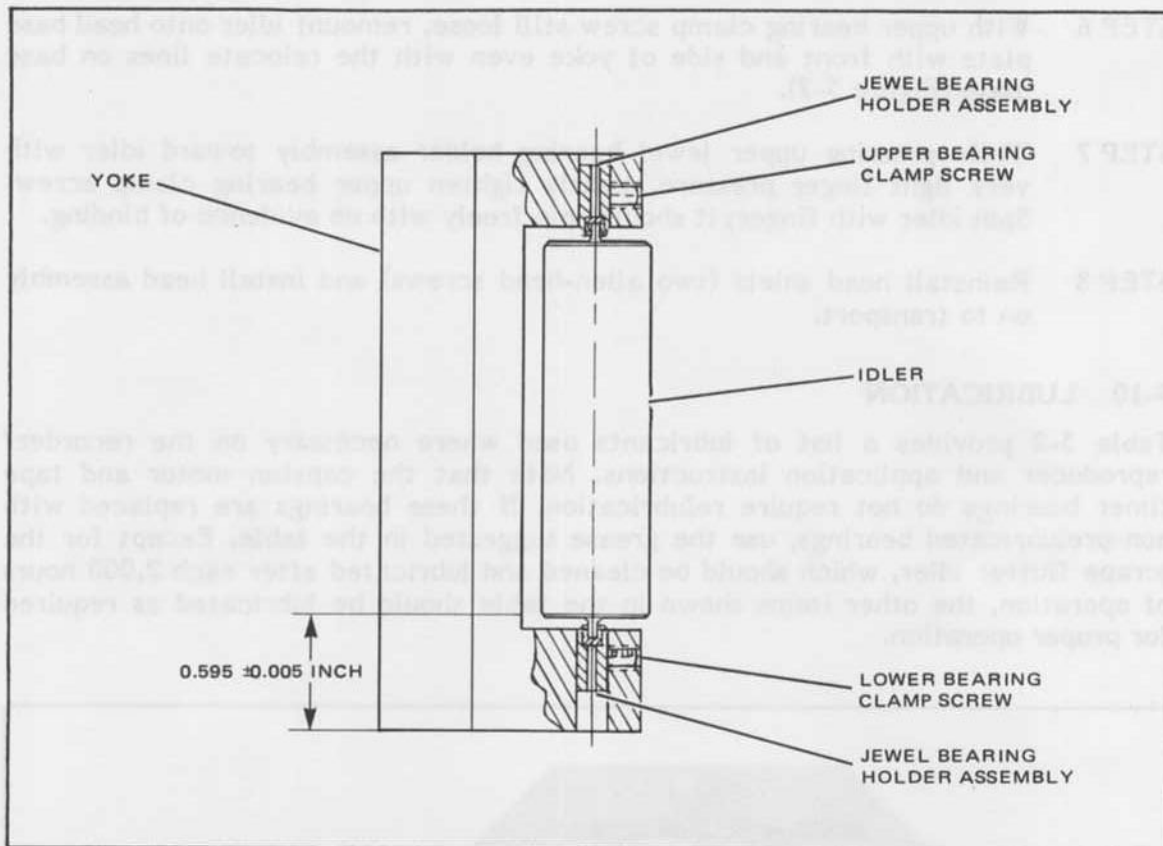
Scrape Flutter Idler, Side Cross-Section View
